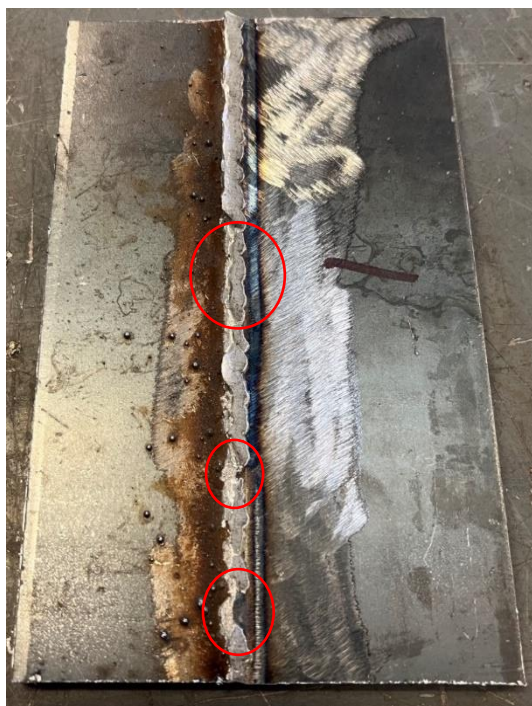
Failed A1 Test Specimen through lack of fusion into bottom plate during fillet weld bending experiment.
